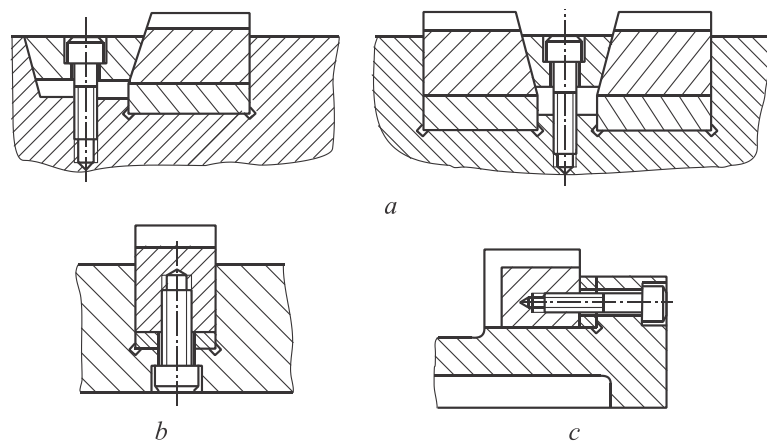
Common types of clamping sections in a surface broach: (a) by a top screw and a wedge; (b) by a bottom screw; (c) by a side screw
